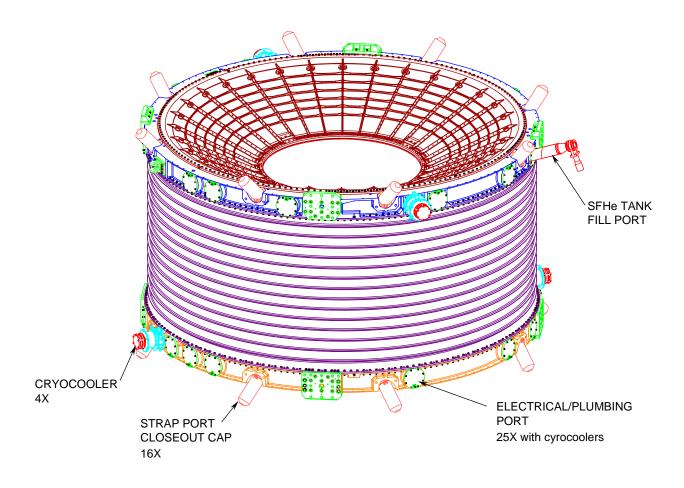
Vacuum Case Assembly (With Misc. Port Attachments)
